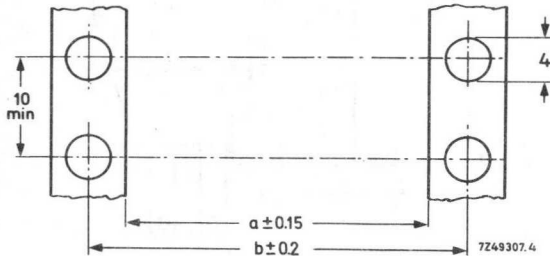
Hole configuration for rail mounting, for dimensions a and b see Table 2
